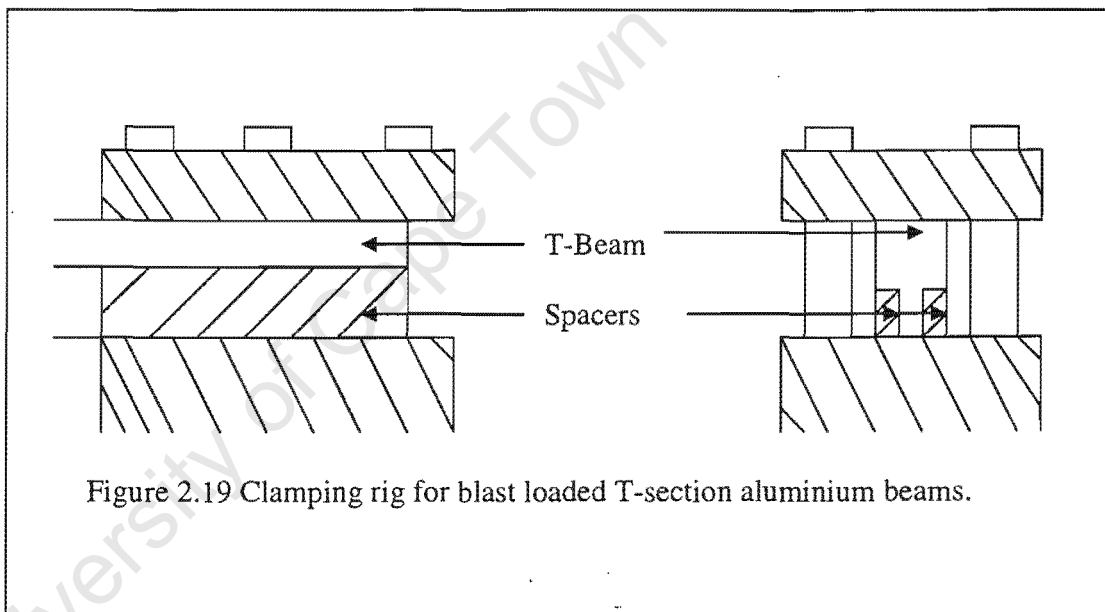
Clamping rig for blast loaded T-section aluminium beams.
